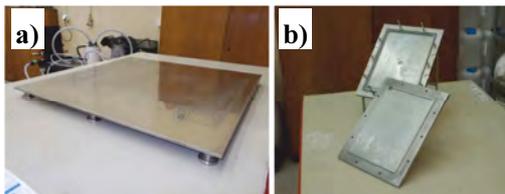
Laboratory metal moulds for manufacturing panels for tests: a) one-part flat mould for VARI method, b) two-part mould for RTM method
